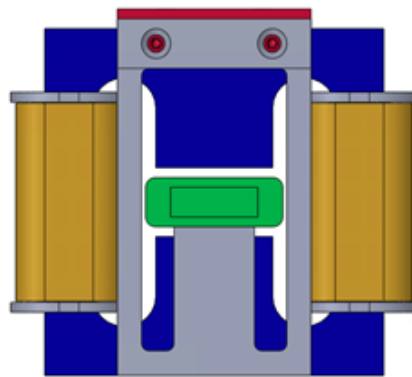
TOP VIEW OF MOVING MAGNET CAD MODEL
